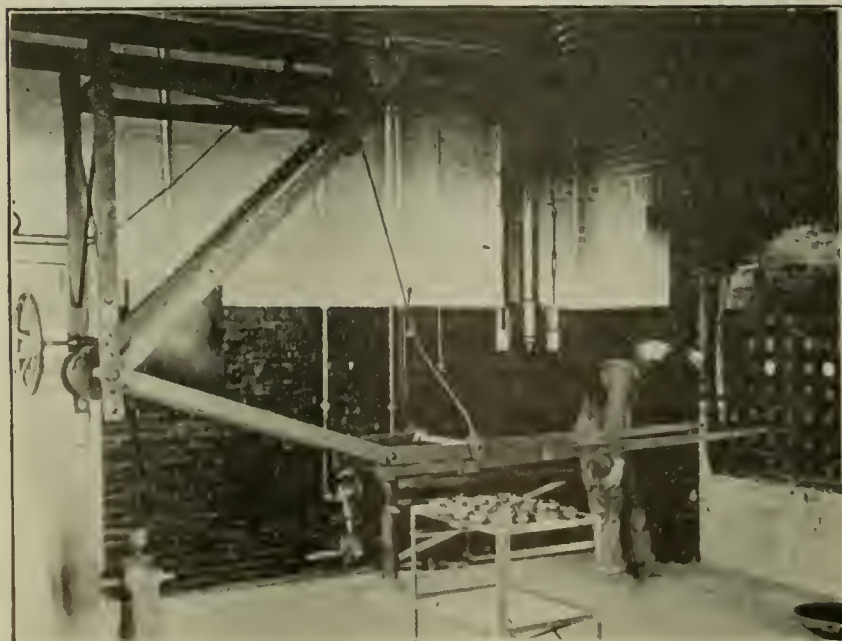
MUFFLE FURNACE AND CHARGING MACHINE
